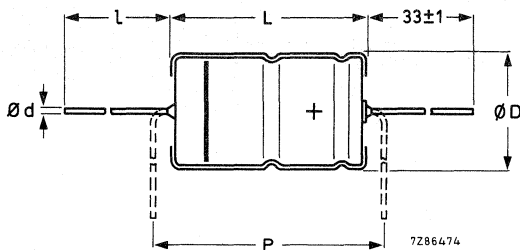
Style 1; see Table 1a for dimensions d, D, L, l and P.
